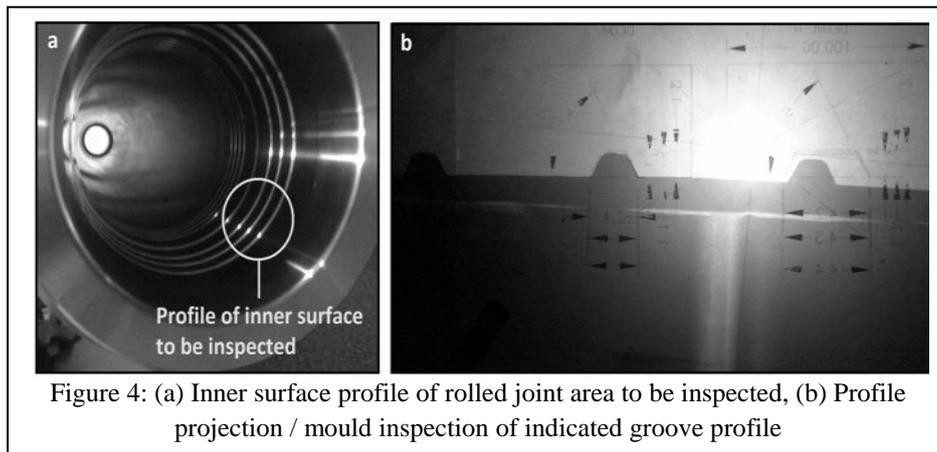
(a) Inner surface profile of rolled joint area to be inspected, (b) Profile projection / mould inspection of indicated groove profile
